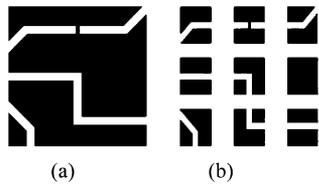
(a) A typical PCB pattern sheet. (b) The pattern is disassembled to nine basic parts.
